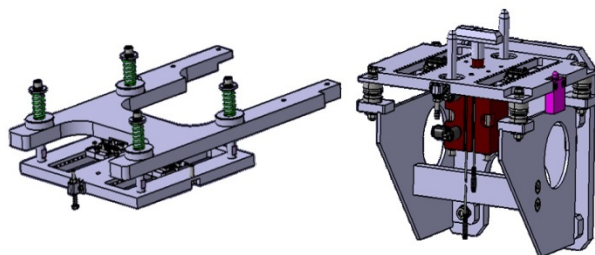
CAD drawings upper part (left) and lower part (right) of the media board including supports
